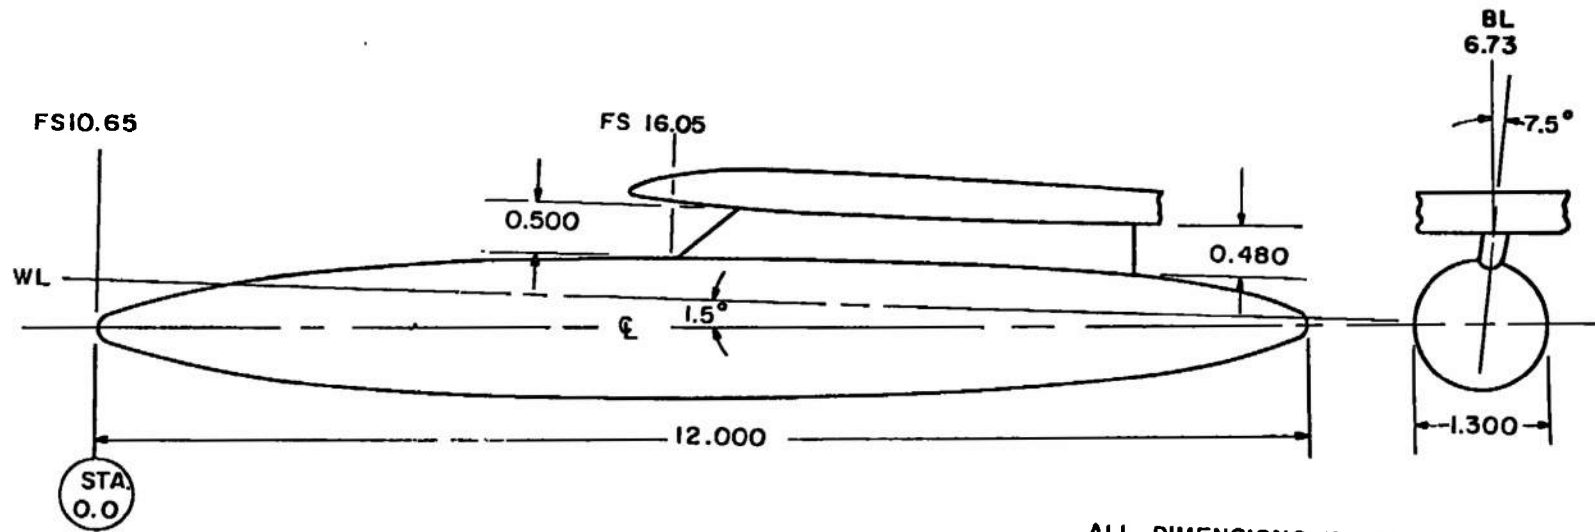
Details and Dimensions of the F-4C Pylon Models
